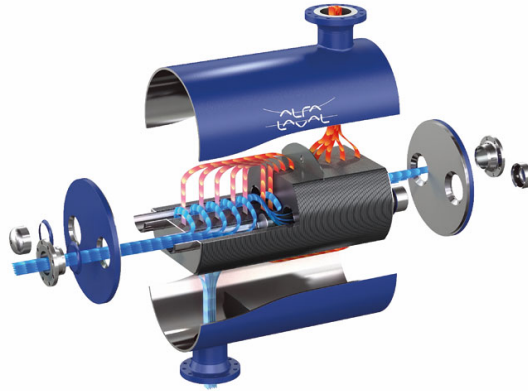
Exploded view of the *Alfa Laval DuroShell* shell-and-plate heat exchanger, the type selected for the primary heat exchanger and regenerator of the ORCHID, showing the cross-flow arrangement determined by the plates configuration. Image courtesy of *Alfa Laval*.
